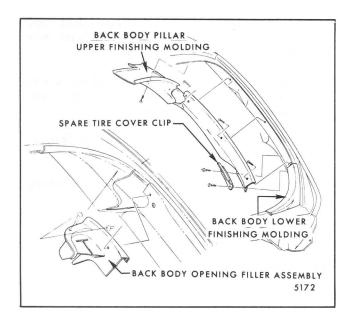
Back Body Pillar Upper Finishing Molding - Right Side Shown
